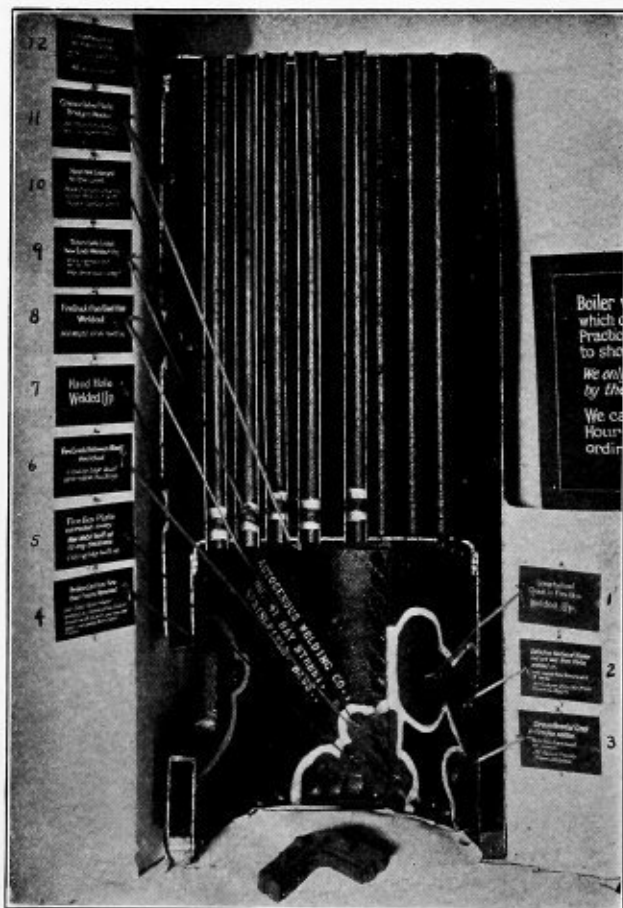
Typical Oxy-Acetylene Welds on a Boiler
